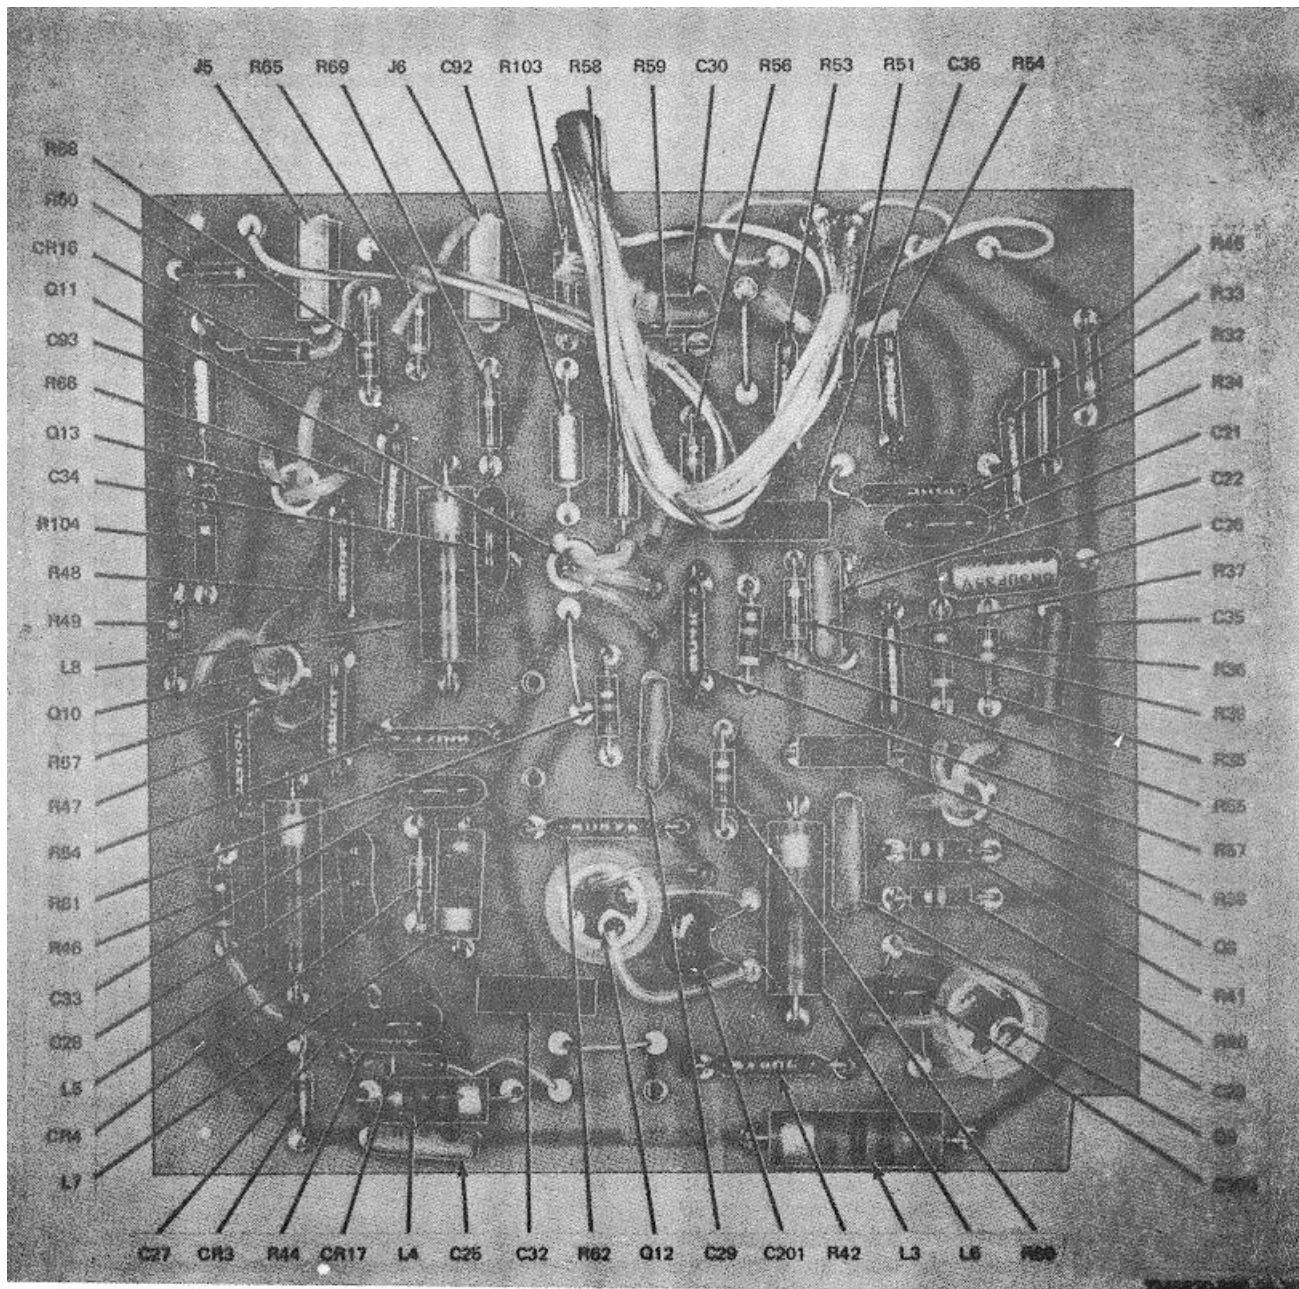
Oscillator Control C-4311/PRC-47 (A8A7), Card Assembly E2.
